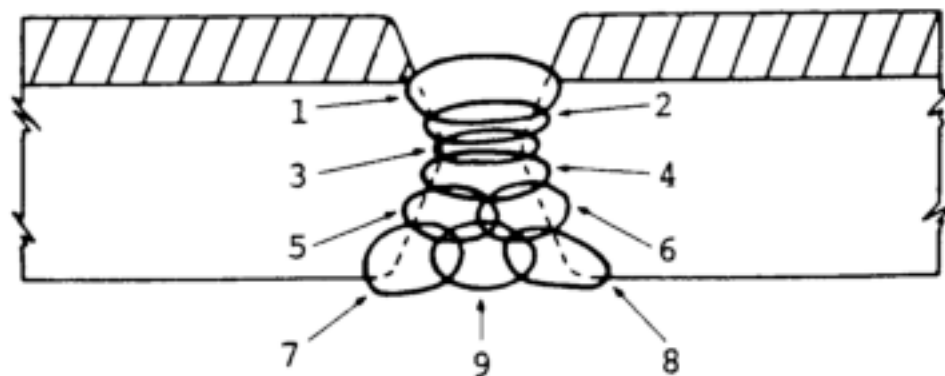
Weld joint data for corner welds on face hardened armor plate.
